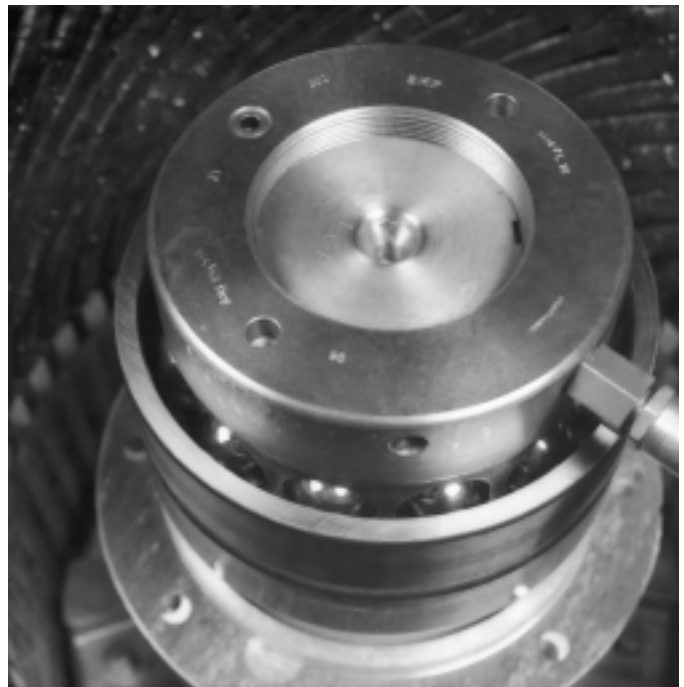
Seating the thrust bearings with hydraulic assembly nut.
